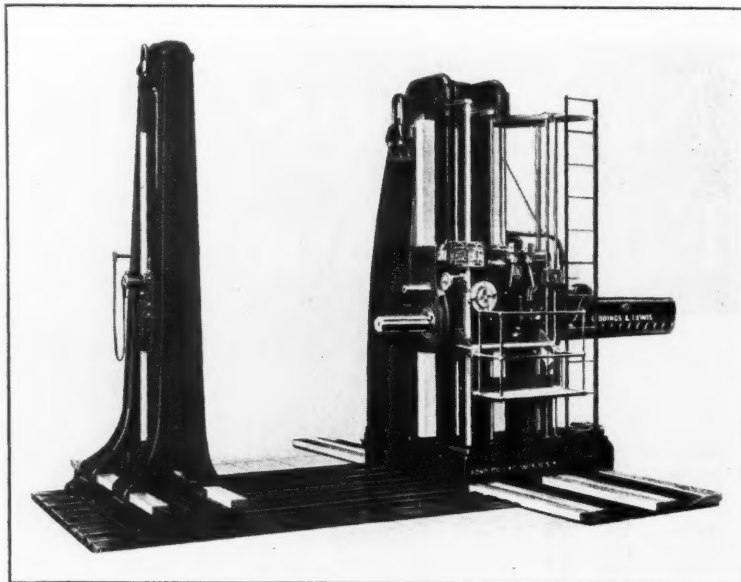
All Three Types of this Machine Have a Complete Electrical Control from a Panel on the Head
